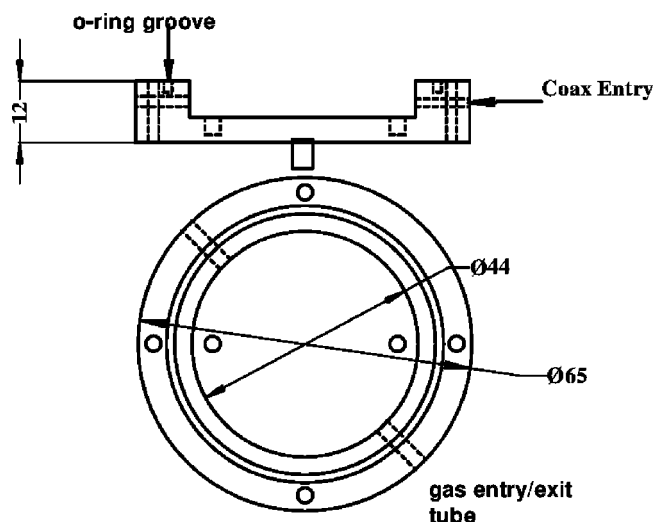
Sectional views of the detector body. All dimensions in mm.
